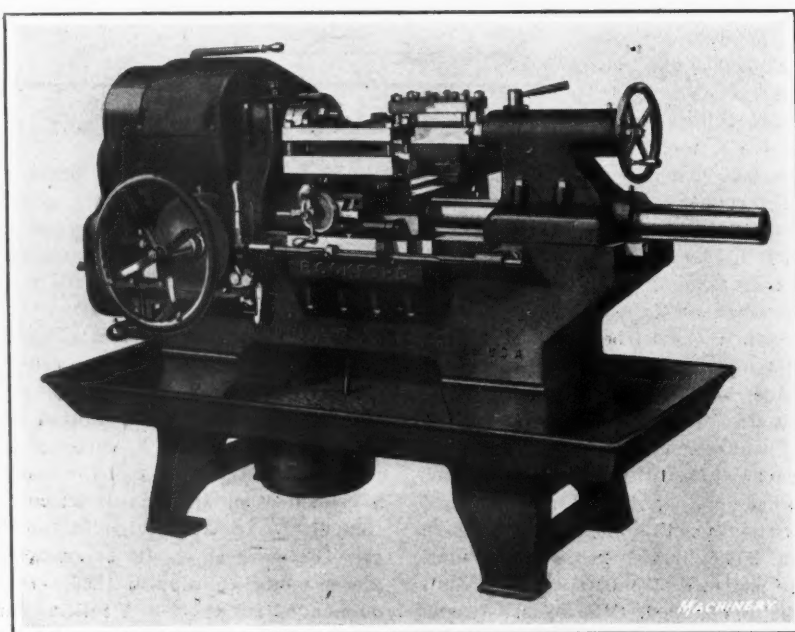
Front View of Automatic Lathe built by the Rockford Machine Tool Co.
